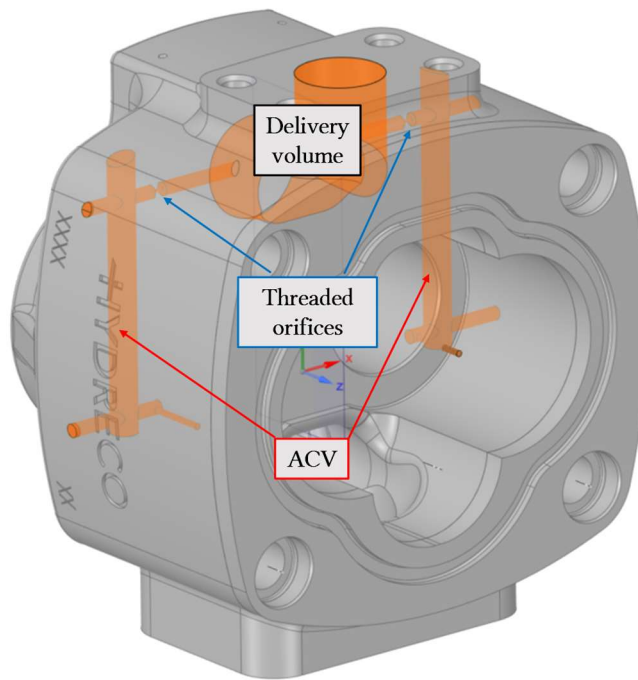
Pump housing views with highlighted ACV surfaces: Prospective view.
